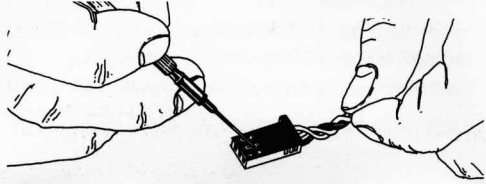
Using the screwdriver, carefully bend each of the metal locking tabs to the angle shown.
